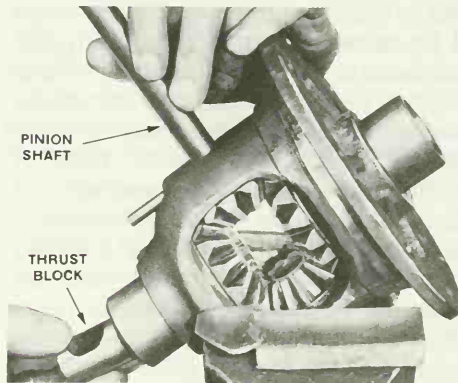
Removing the pinion shaft or cross shaft and thrust block. (American Motors Corporation)
